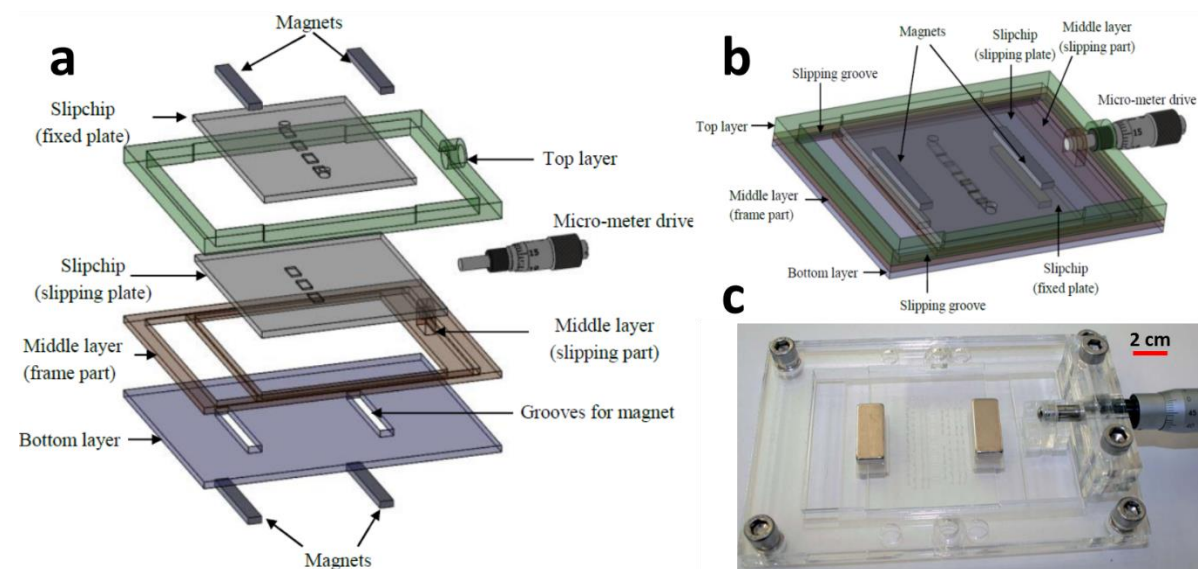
3D Schematic of the Slipchip holding platform a) Illustration of different layers of platform before assembly showing top, middle and bottom layers, and Slipchips used for IEF separations, b) 3D schematic of the fully assembled platform including micrometre, magnets, and Slipchips used for IEF separations, c) Snapshot of the fully assembled IEF separation platform. [77].
